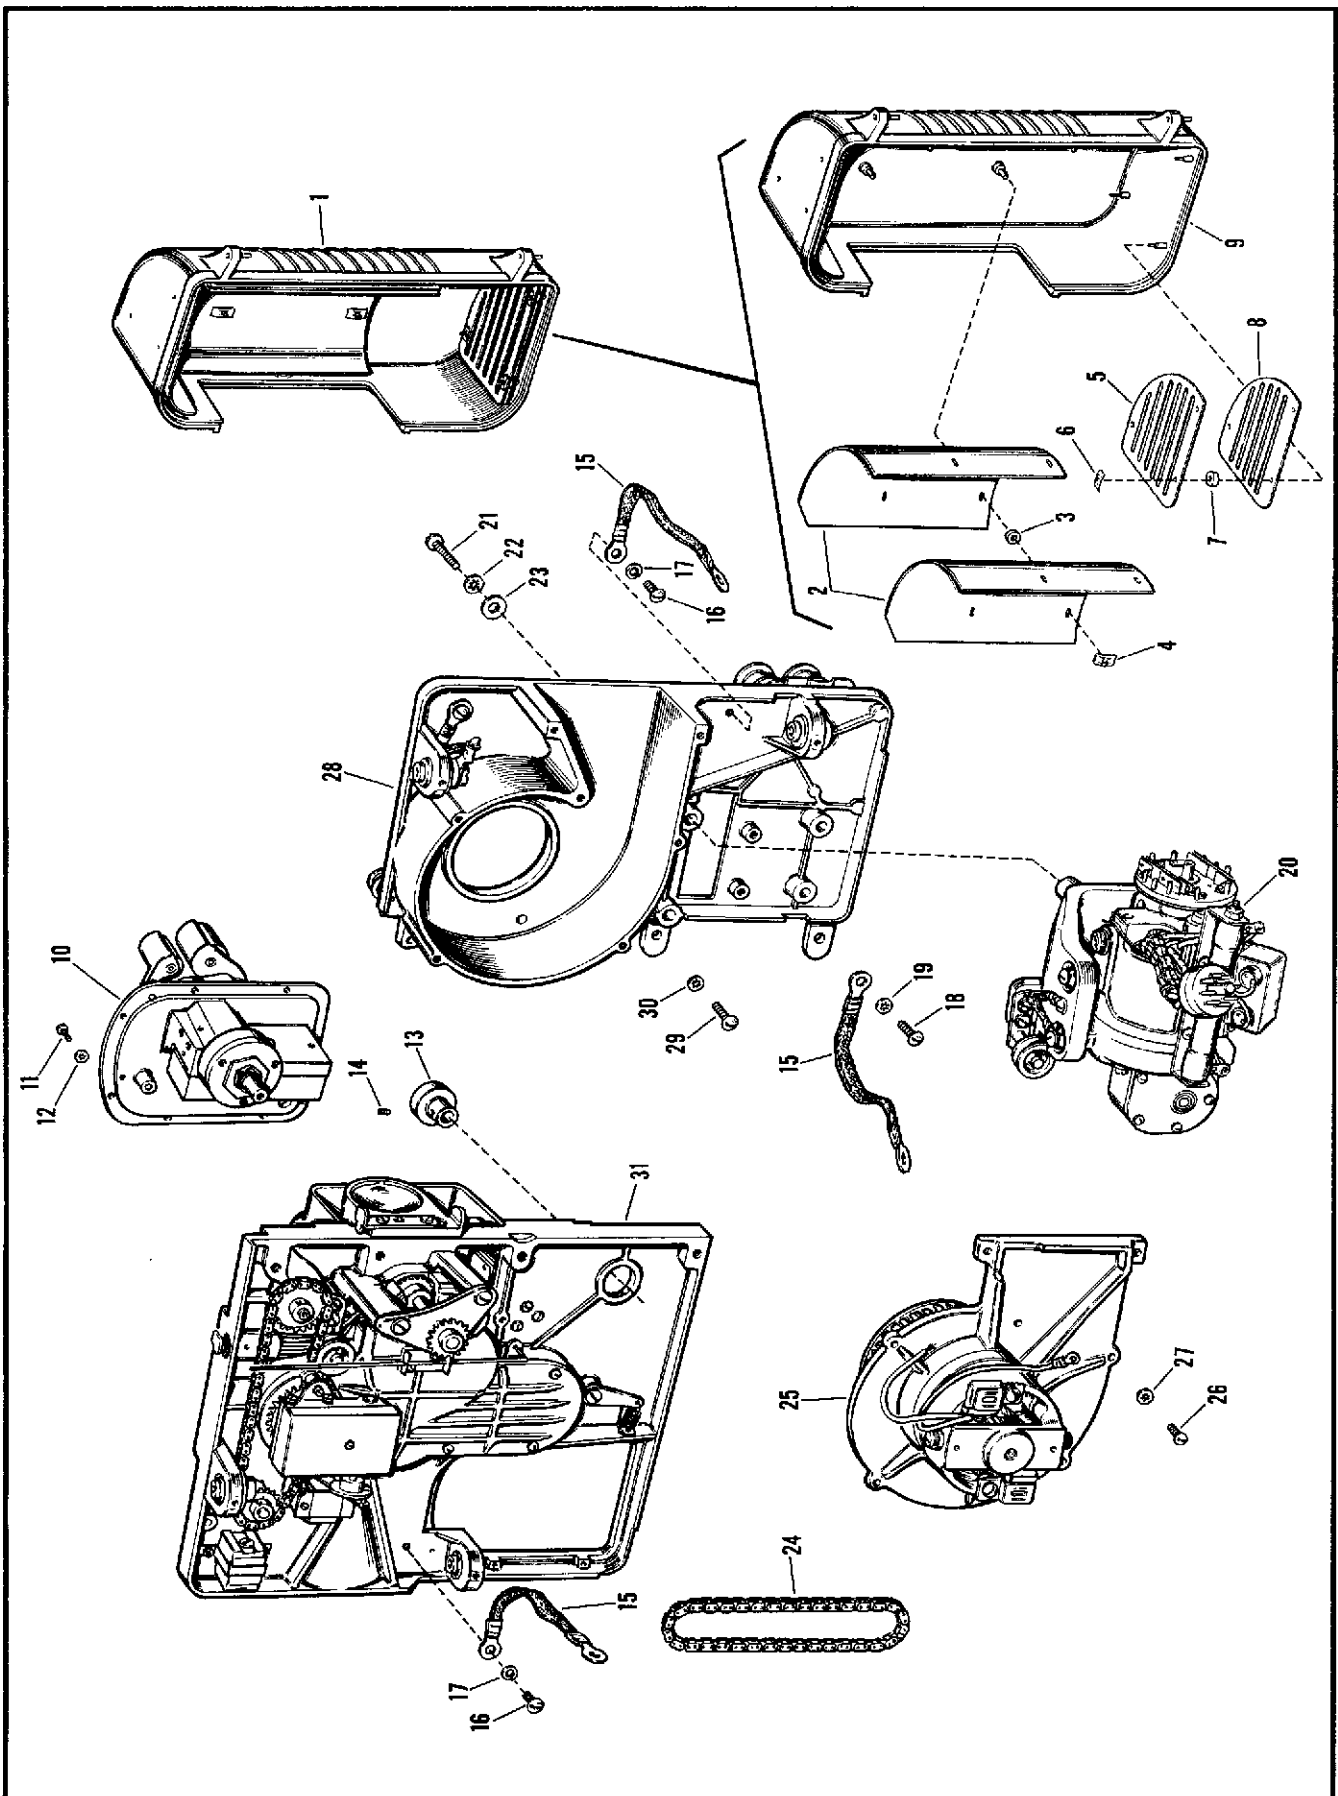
Removing Sound Head, Drive Motor and Blower Motor
